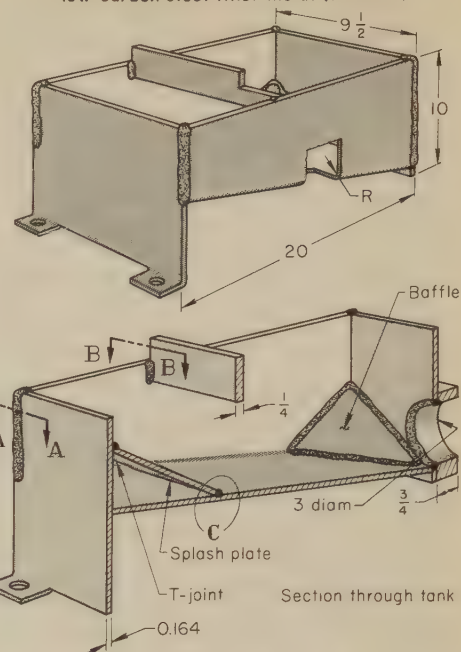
Sump tank, and details of joints welded by the gas metal-arc process (under conditions listed in Table 9) in about 30% less total time than had been required for shielded metal-arc welding (Example 117)
